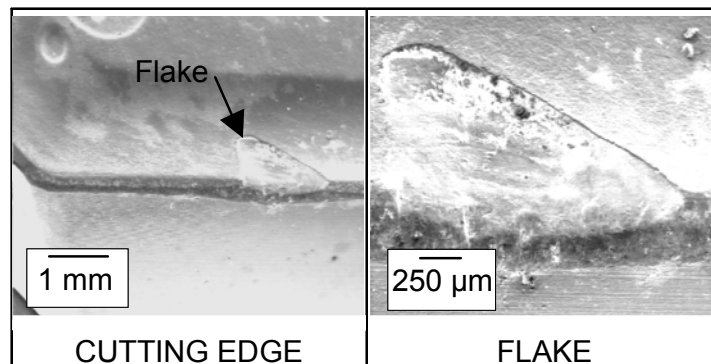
Tool Cutter cutting edge flaking during the machining of the 3.0L V6 engine blocks with cast iron liners.
